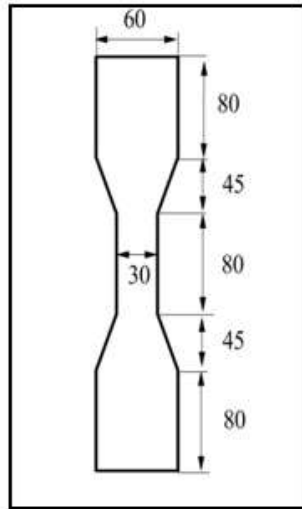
(a) shows the dimensions of the 30 mm thickness specimens. The specimens were carefully assembled in the clamps so they could withstand the tensile load. The bolt holes on each side were aligned along with the same direction to avoid torque or bending loads during the experiments.
